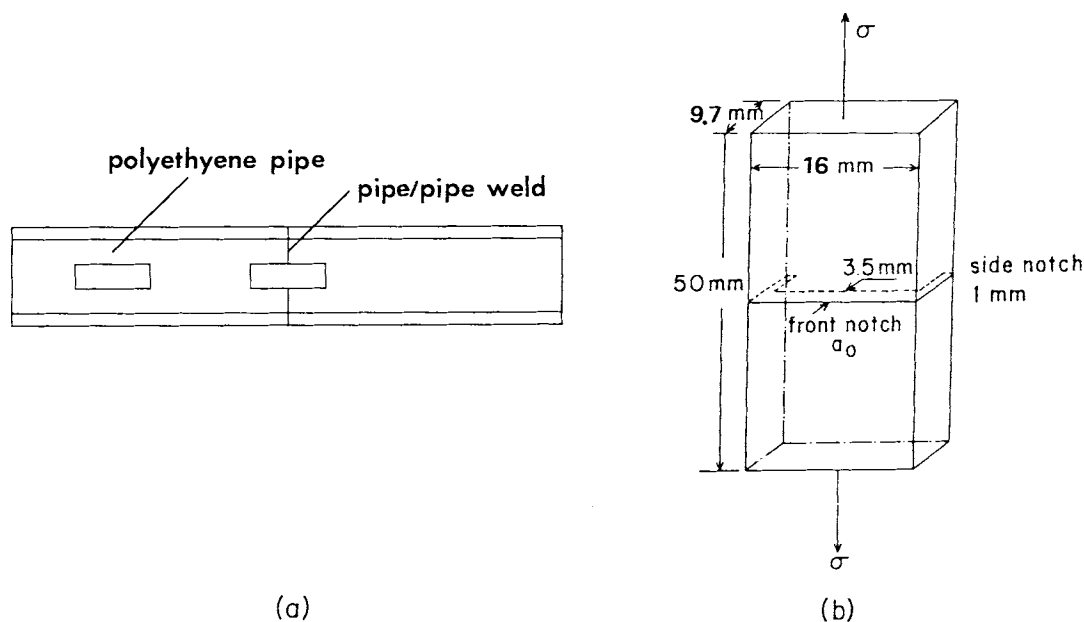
(a) Orientation of test specimens from weld joint and reference pipe; (b) specimen geometry.
